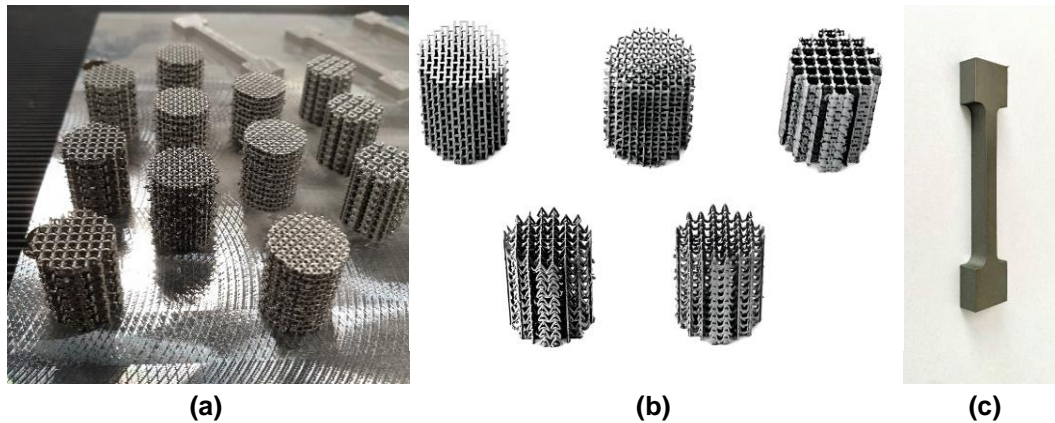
Selective laser melted CoCrMo samples showing (a) printed samples on the base plate before post-processing, (b) post-processed scaffold samples and (c) tensile test coupon
